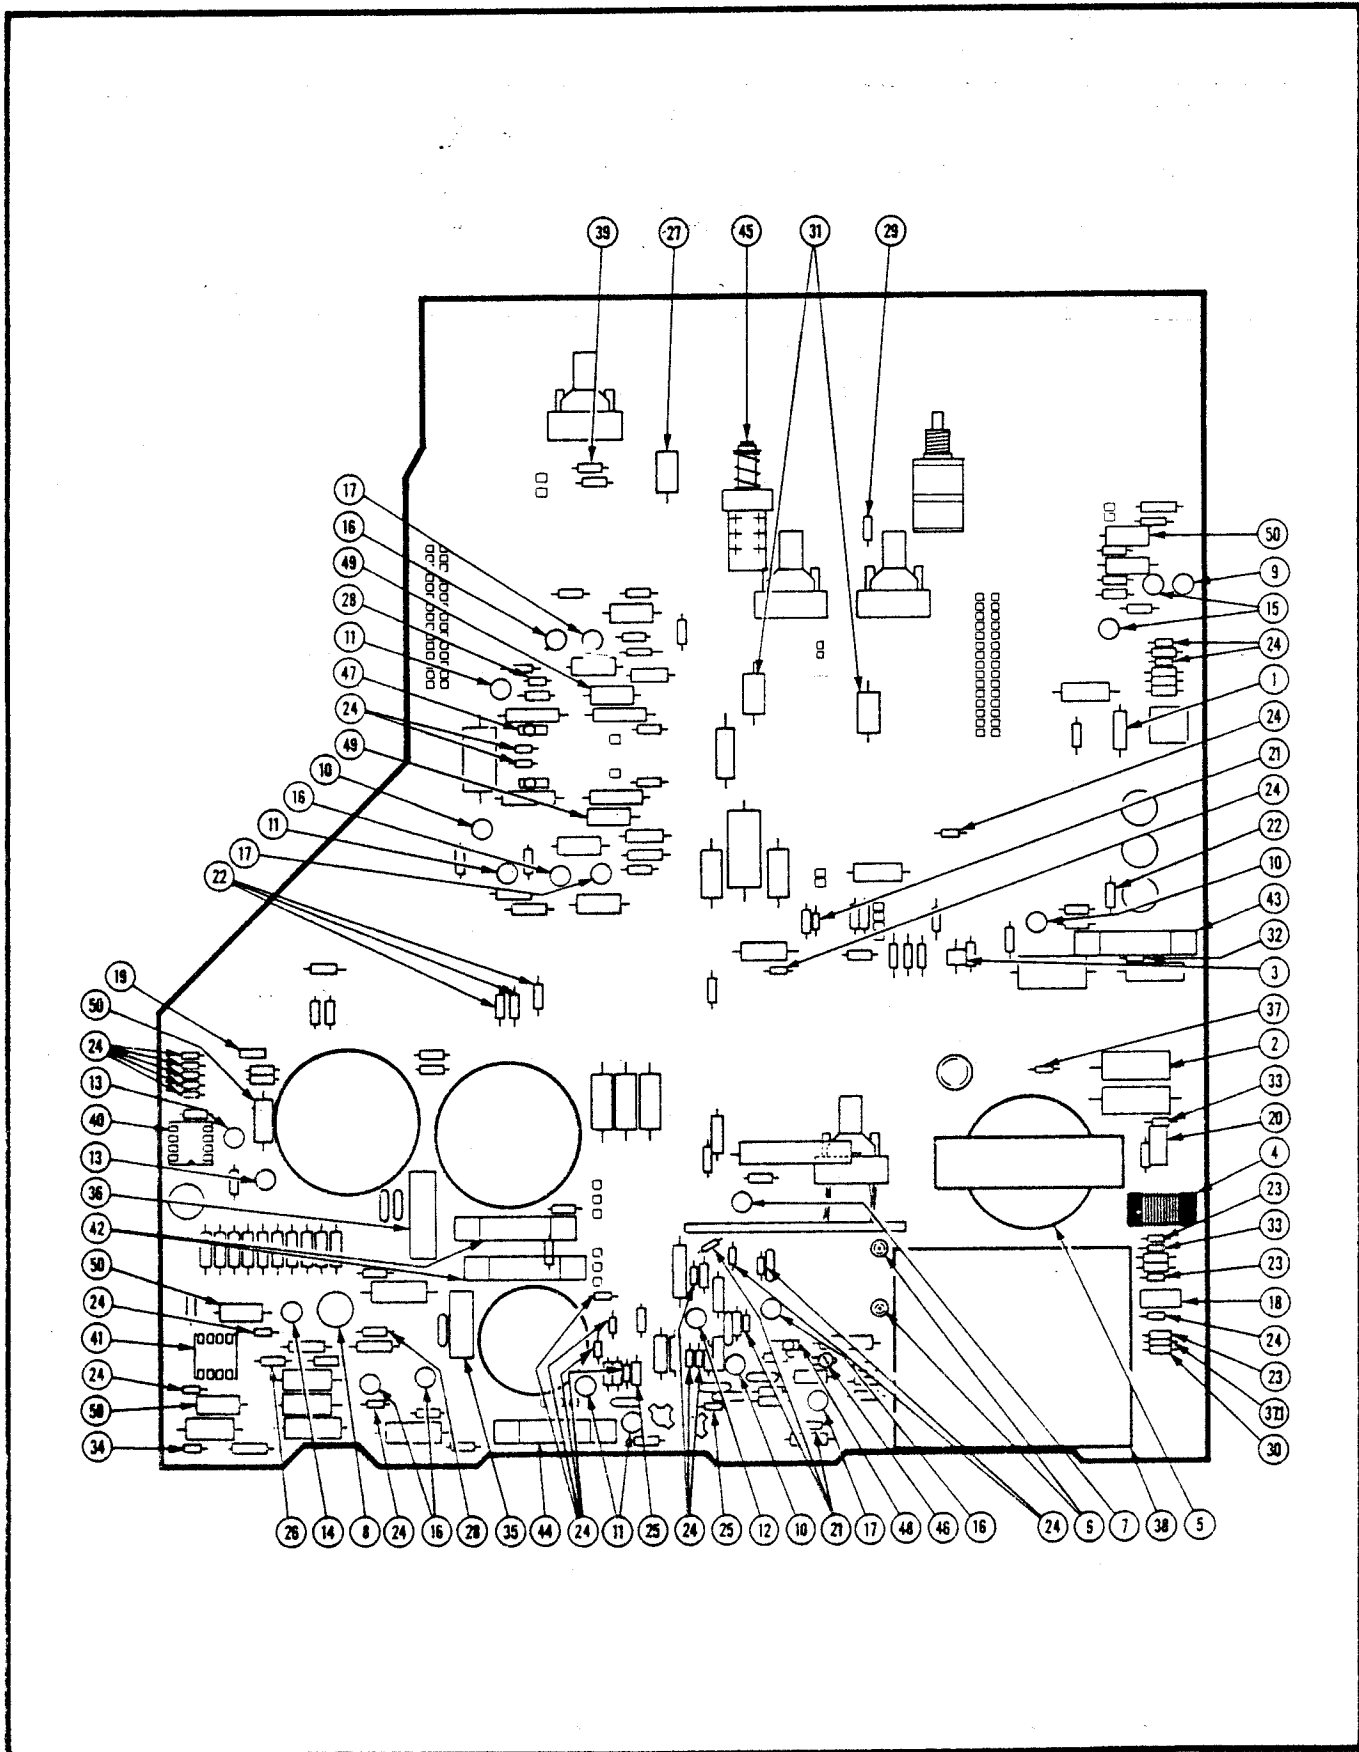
A11 Circuit Board Assembly, Interface (sheet 1 of 4).
